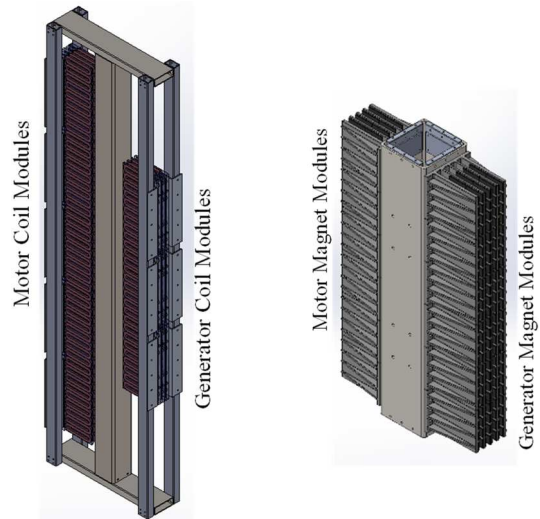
Left: Single, linear machine stator assembly with motor/generator modules indicated. Right Single, linear machine translator with motor/generator modules indicated.
